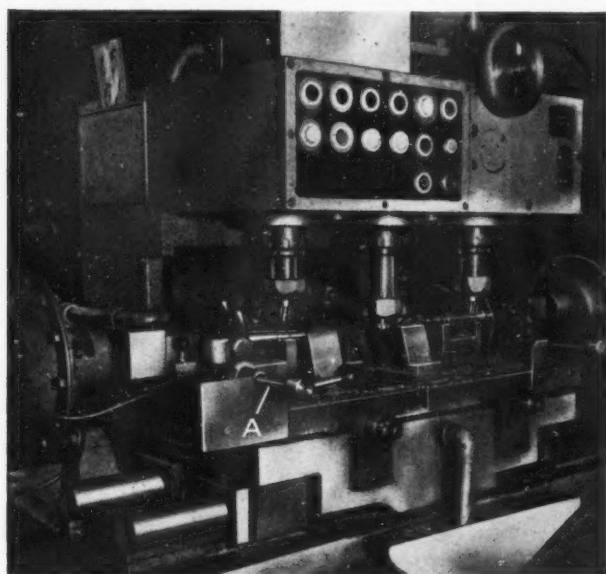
On This Special-purpose Fertigungsmittel 3-spindle Machine, the Key-slot, and a Reference-face on One King-pin Boss, are Machined Simultaneously on Each Component
